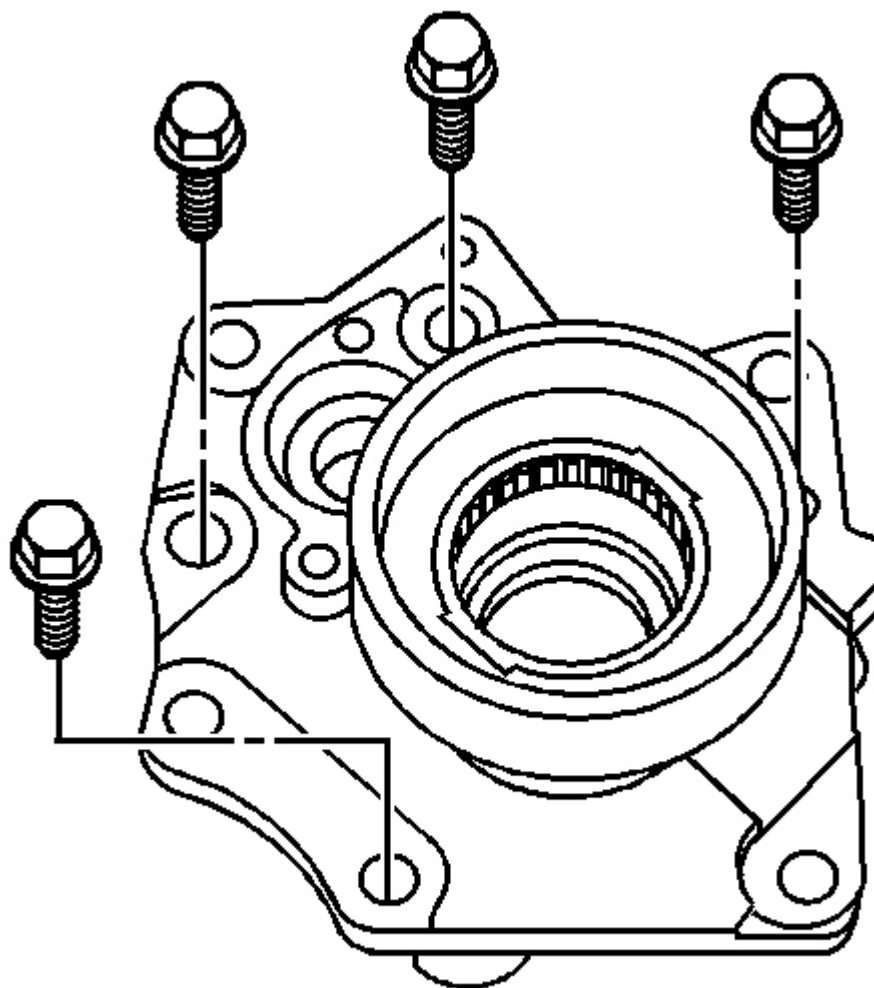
View Of Intermediate Shaft Bearing Case Bolts
